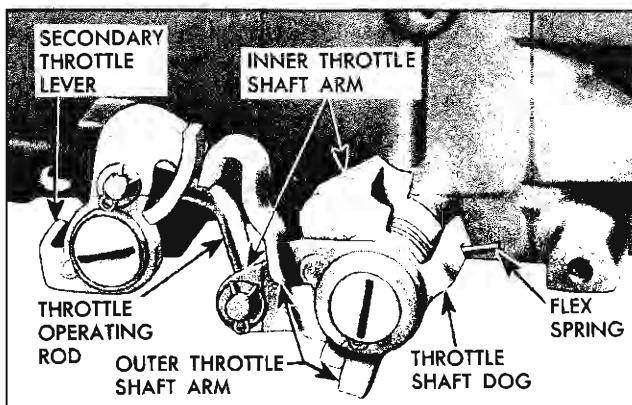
B-116 Primary and Secondary Throttle Linkage Installed
